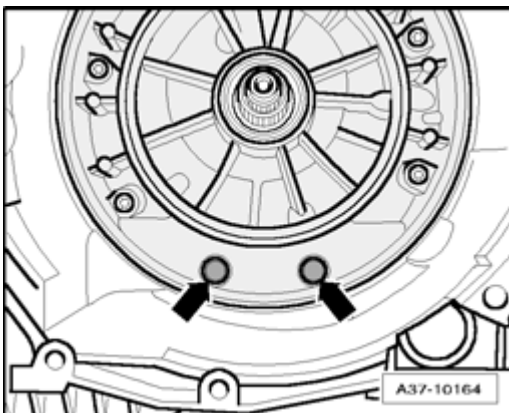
Caps For Threaded Connection Of ATF Supply At Bottom Of Converter Housing
